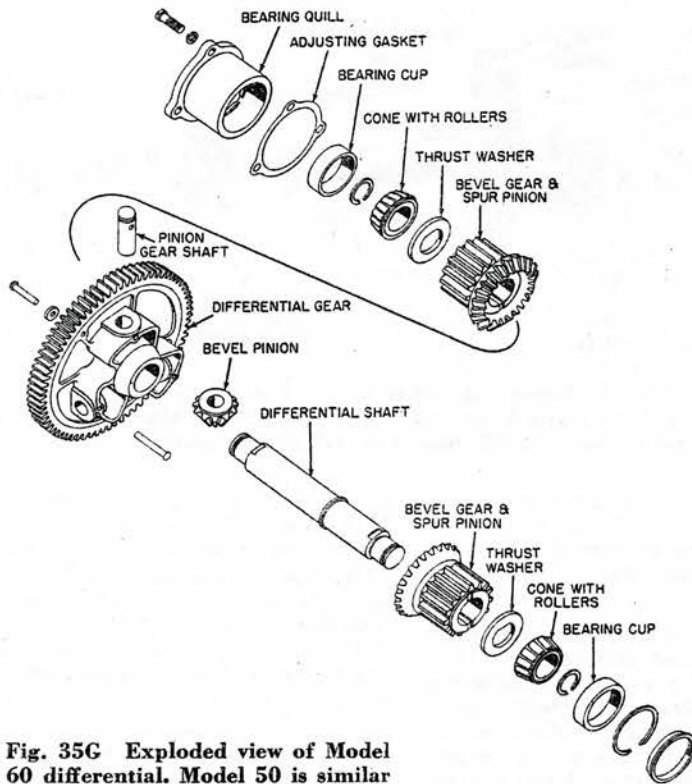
C Exploded view of Model 60 differential. Model 50 is similar
